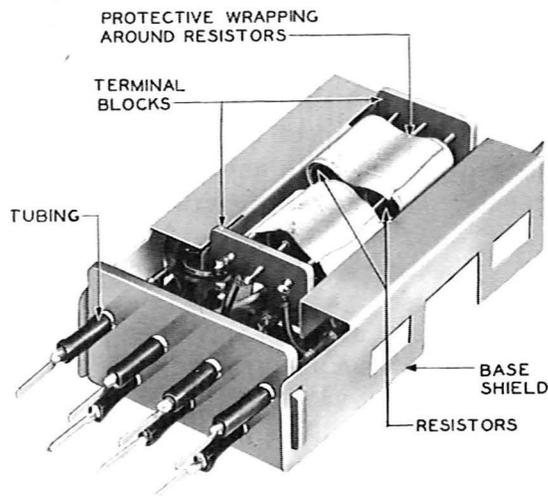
289-Type Relay With Cover and Cover Shield Removed (Top View)
